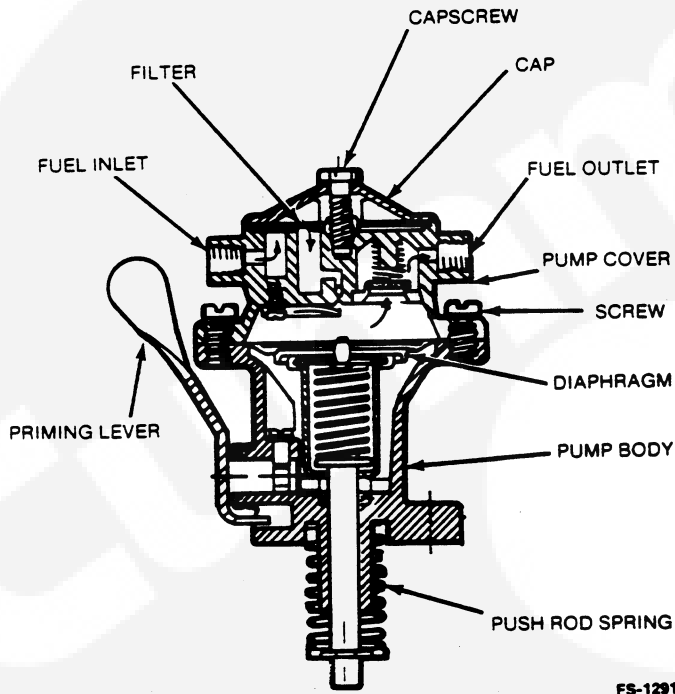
MECHANICAL FUEL TRANSFER PUMP
